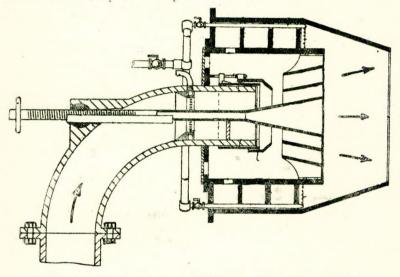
Buell Burner with Screw Adjustment for making a long flame or a short stubby one, also Movable Shield to deflect the flame.
